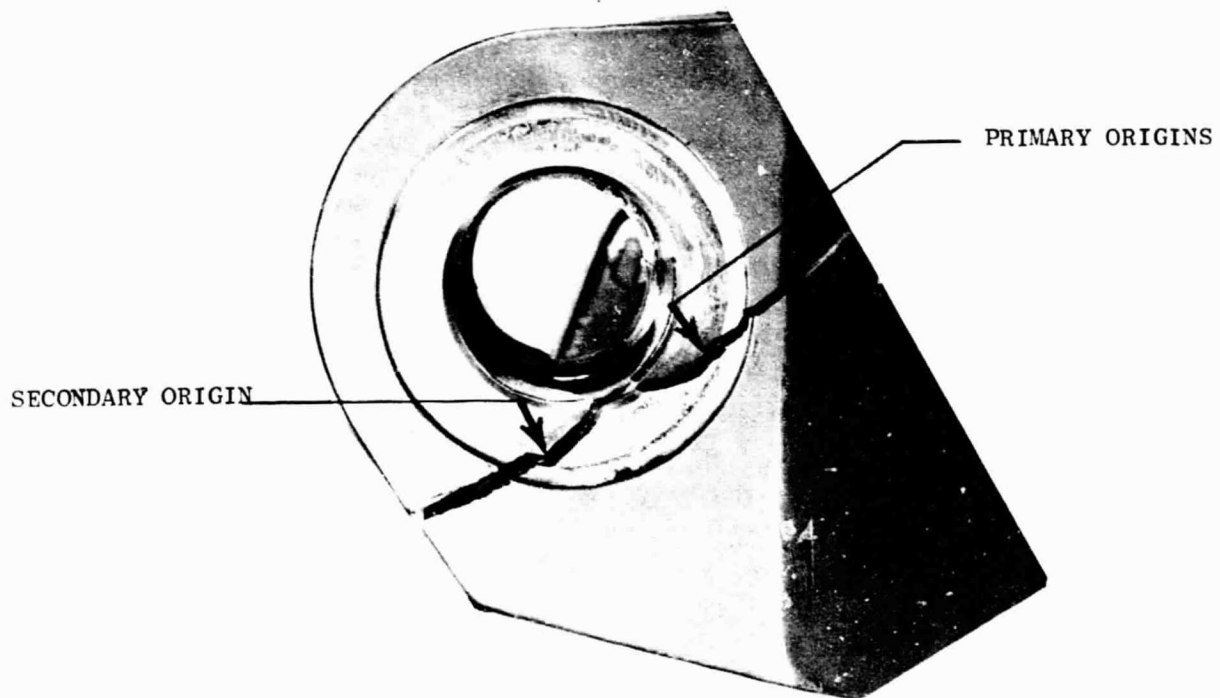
Origins of Fatigue Cracking in Left Hand Lug of New Front Mount Platform (Upper Surface) After 47,360 Simulated Flight Cycles, Hole Bushing Removed.
